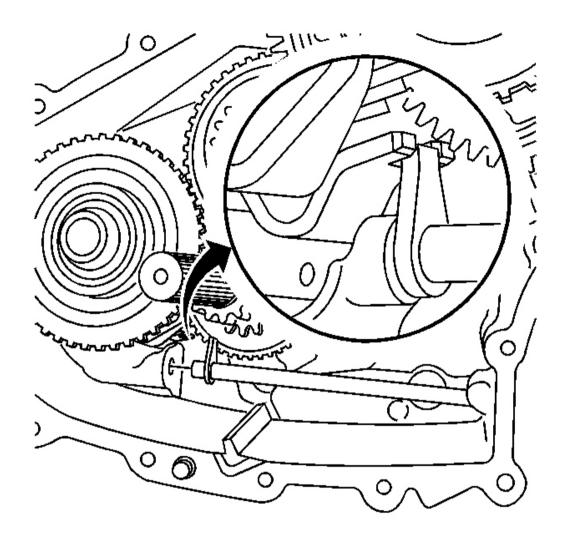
View Of Shift Fork Courtesy of GENERAL MOTORS CORP.
